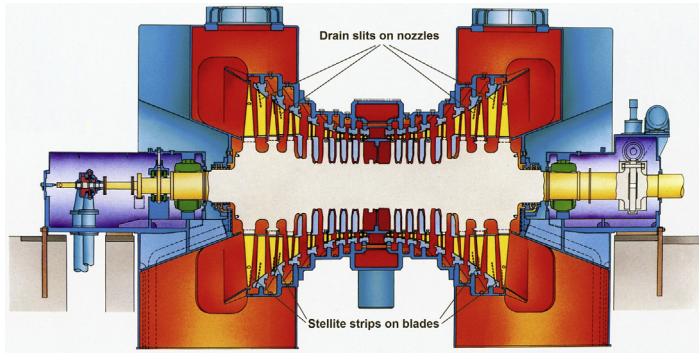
Section view of Darajat Unit 2 steam turbine. After Ref. [22] [WWW].
